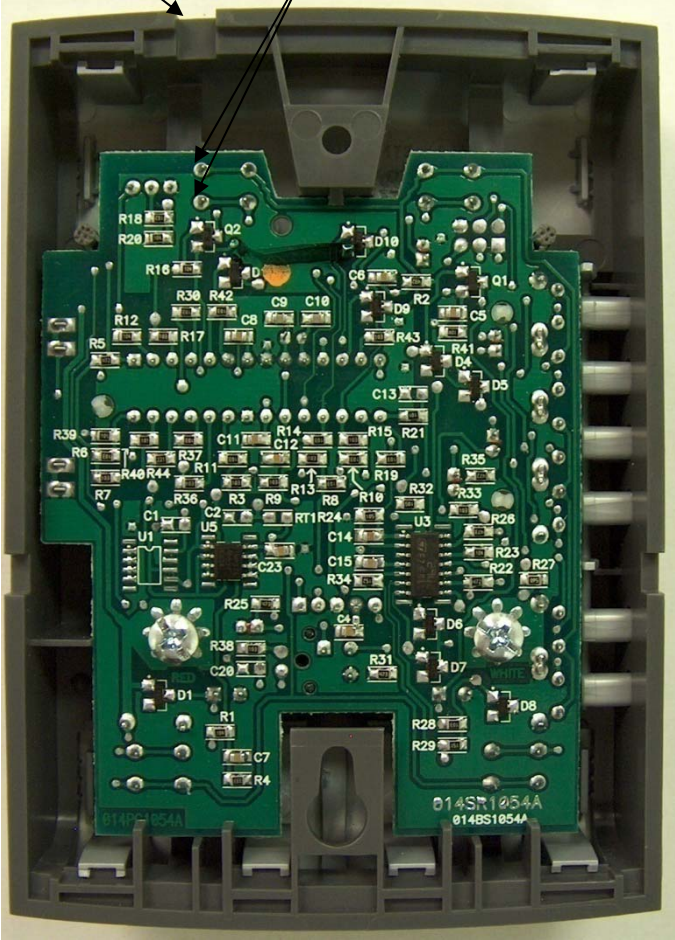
Back of 398LM Smart Control Panel With Pressboard Backing Removed
